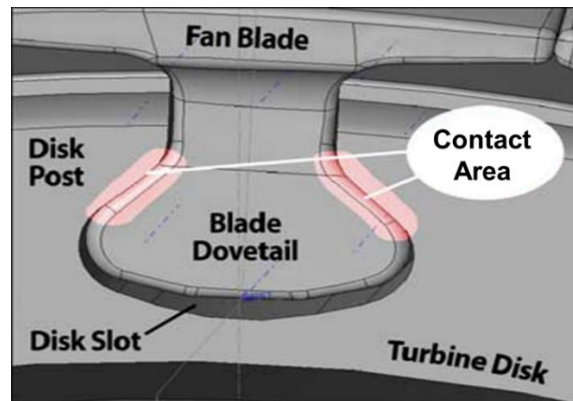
Sketch of a dovetail blade into a turbine disk [1]
